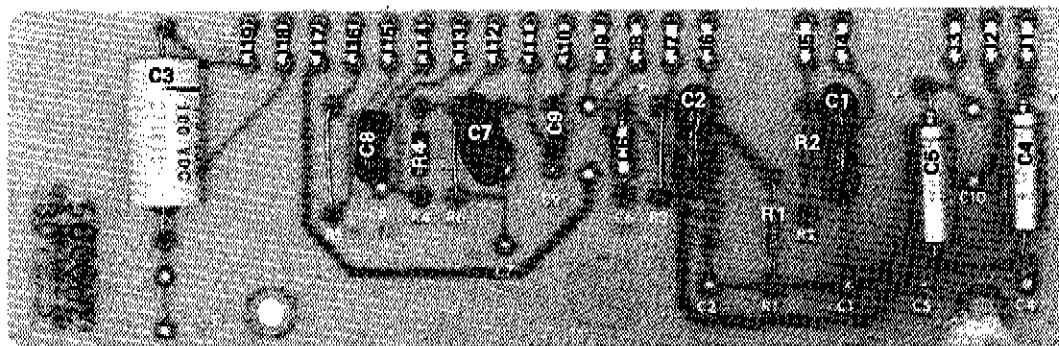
PCB ASSEMBLY, 5000 Hz (-07 Option)
